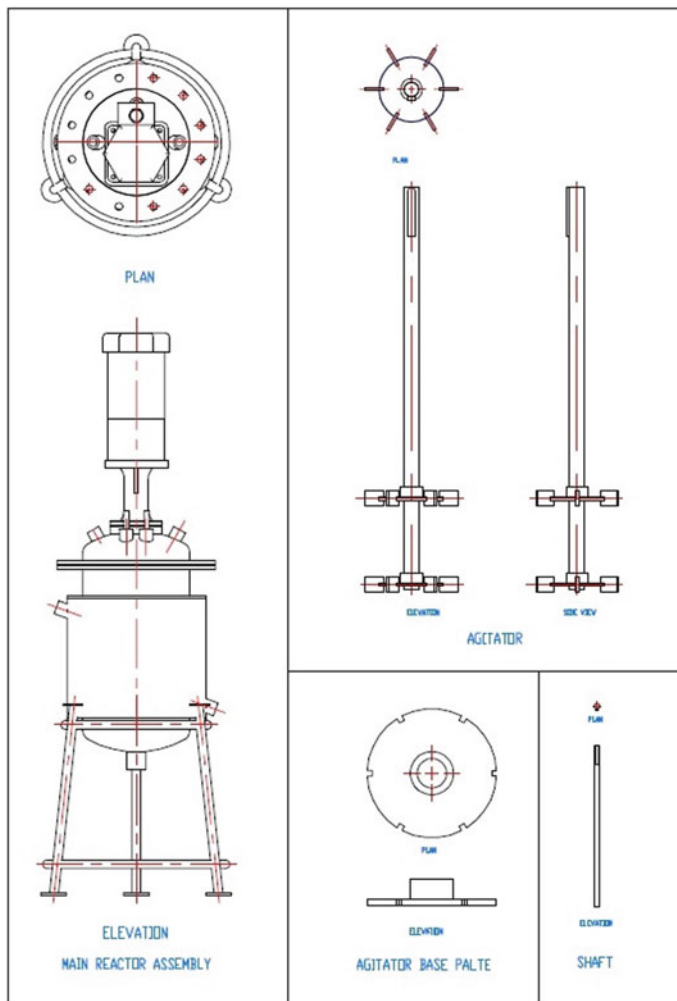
Technical drawings-1 of each part with the assembly of batch reactor of laboratory scale
